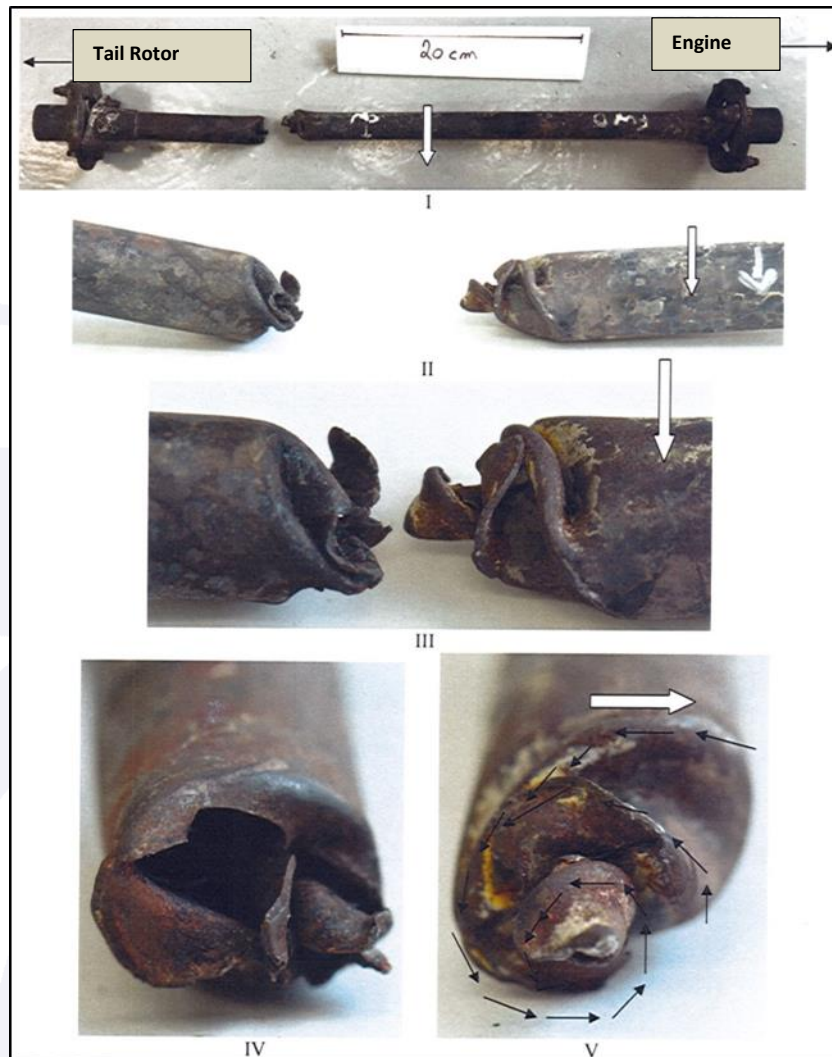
Connecting shaft between the "Gearbox" and the tail rotor.
